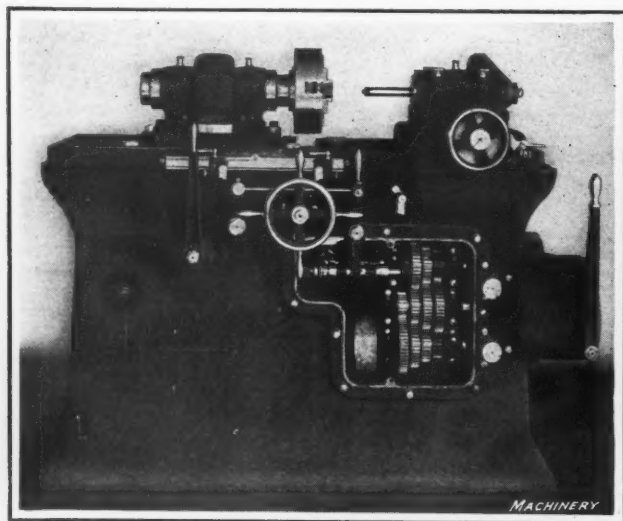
Type A Internal Grinding Machine built by the Worcester Machine Works, Inc.
